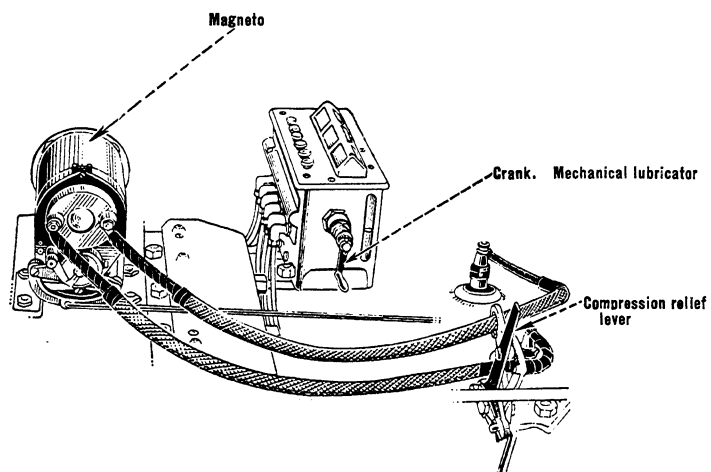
Illustration No. 3—Detail—hand crank on lubricator, relief lever and magneto.
